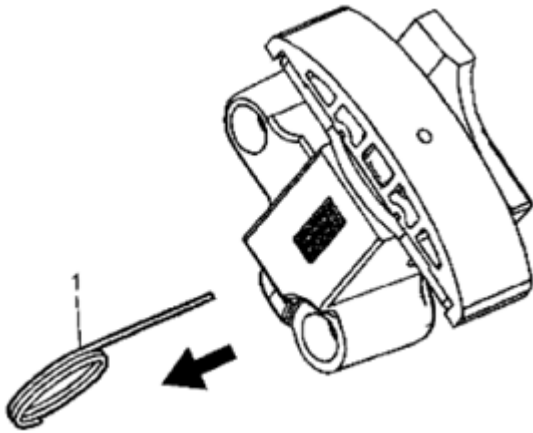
Identifying Gasket And Timing Chain Tensioner Adjuster No. 2
